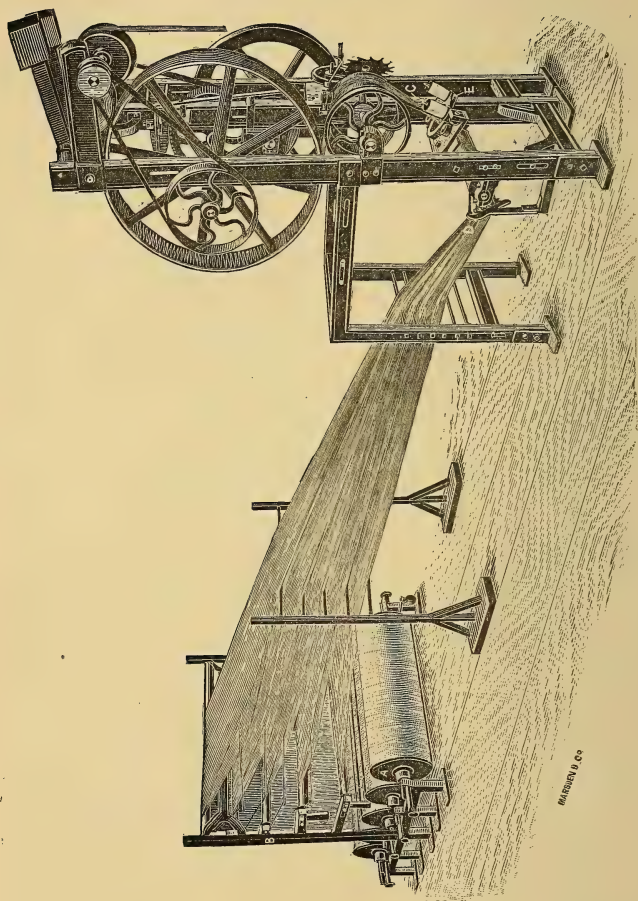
IMPROVED LOOSE WARMING MACHINE.
